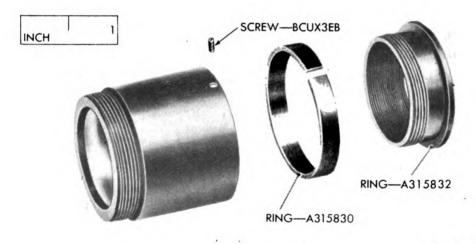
Lens Tube – Exploded From Eyepiece Assembly
